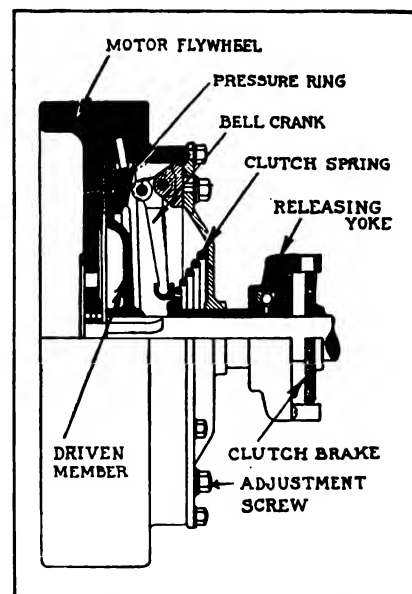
PART SECTIONAL VIEW OF BORG AND BECK THREE PLATE CLUTCH
